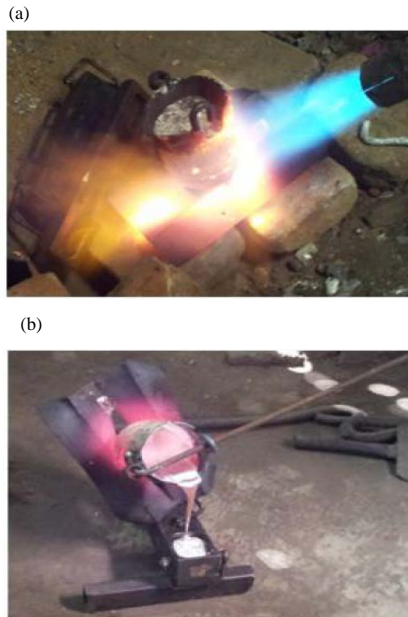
Smelting aluminium scrap (a) and pouring it into the mold (b)
